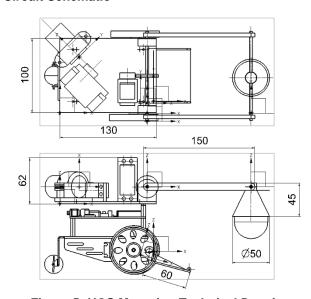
UGS Mounting Technical Drawing (dimensions in mm)
